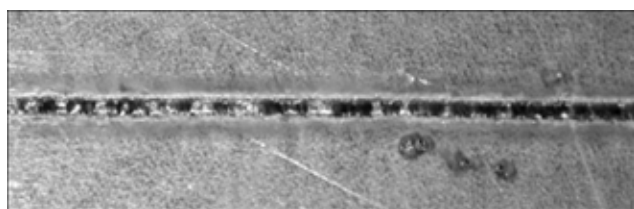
Weld seam of zinc-coated steel sheets in zero-gap overlap joint configuration
